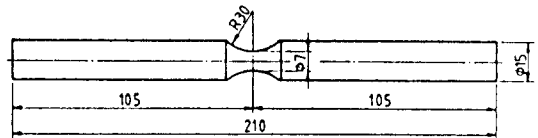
Configuration and dimensions of rotating bending fatigue test specimen
